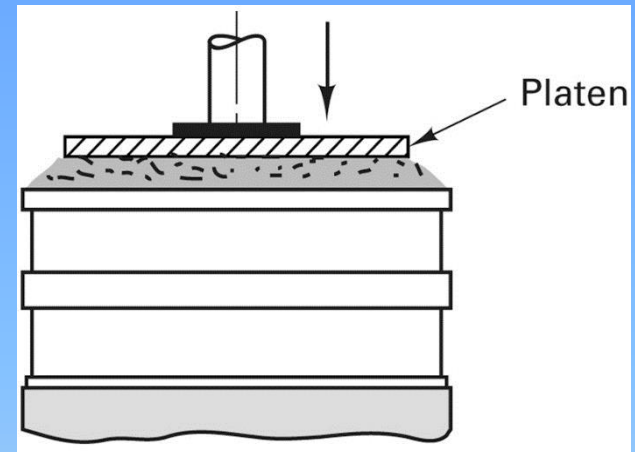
(Above) Squeezing a sand-filled mold section. While the pattern is on the bottom, the highest packing will be directly under the squeeze head.
